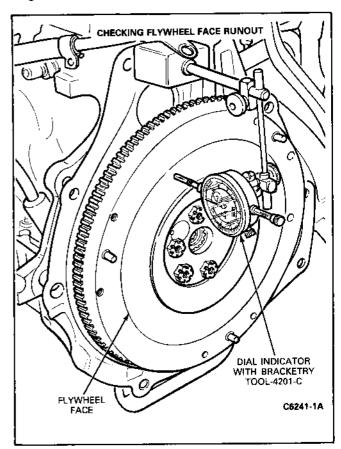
Checking Flywheel Face Runout — Manual Transmission — Typical
